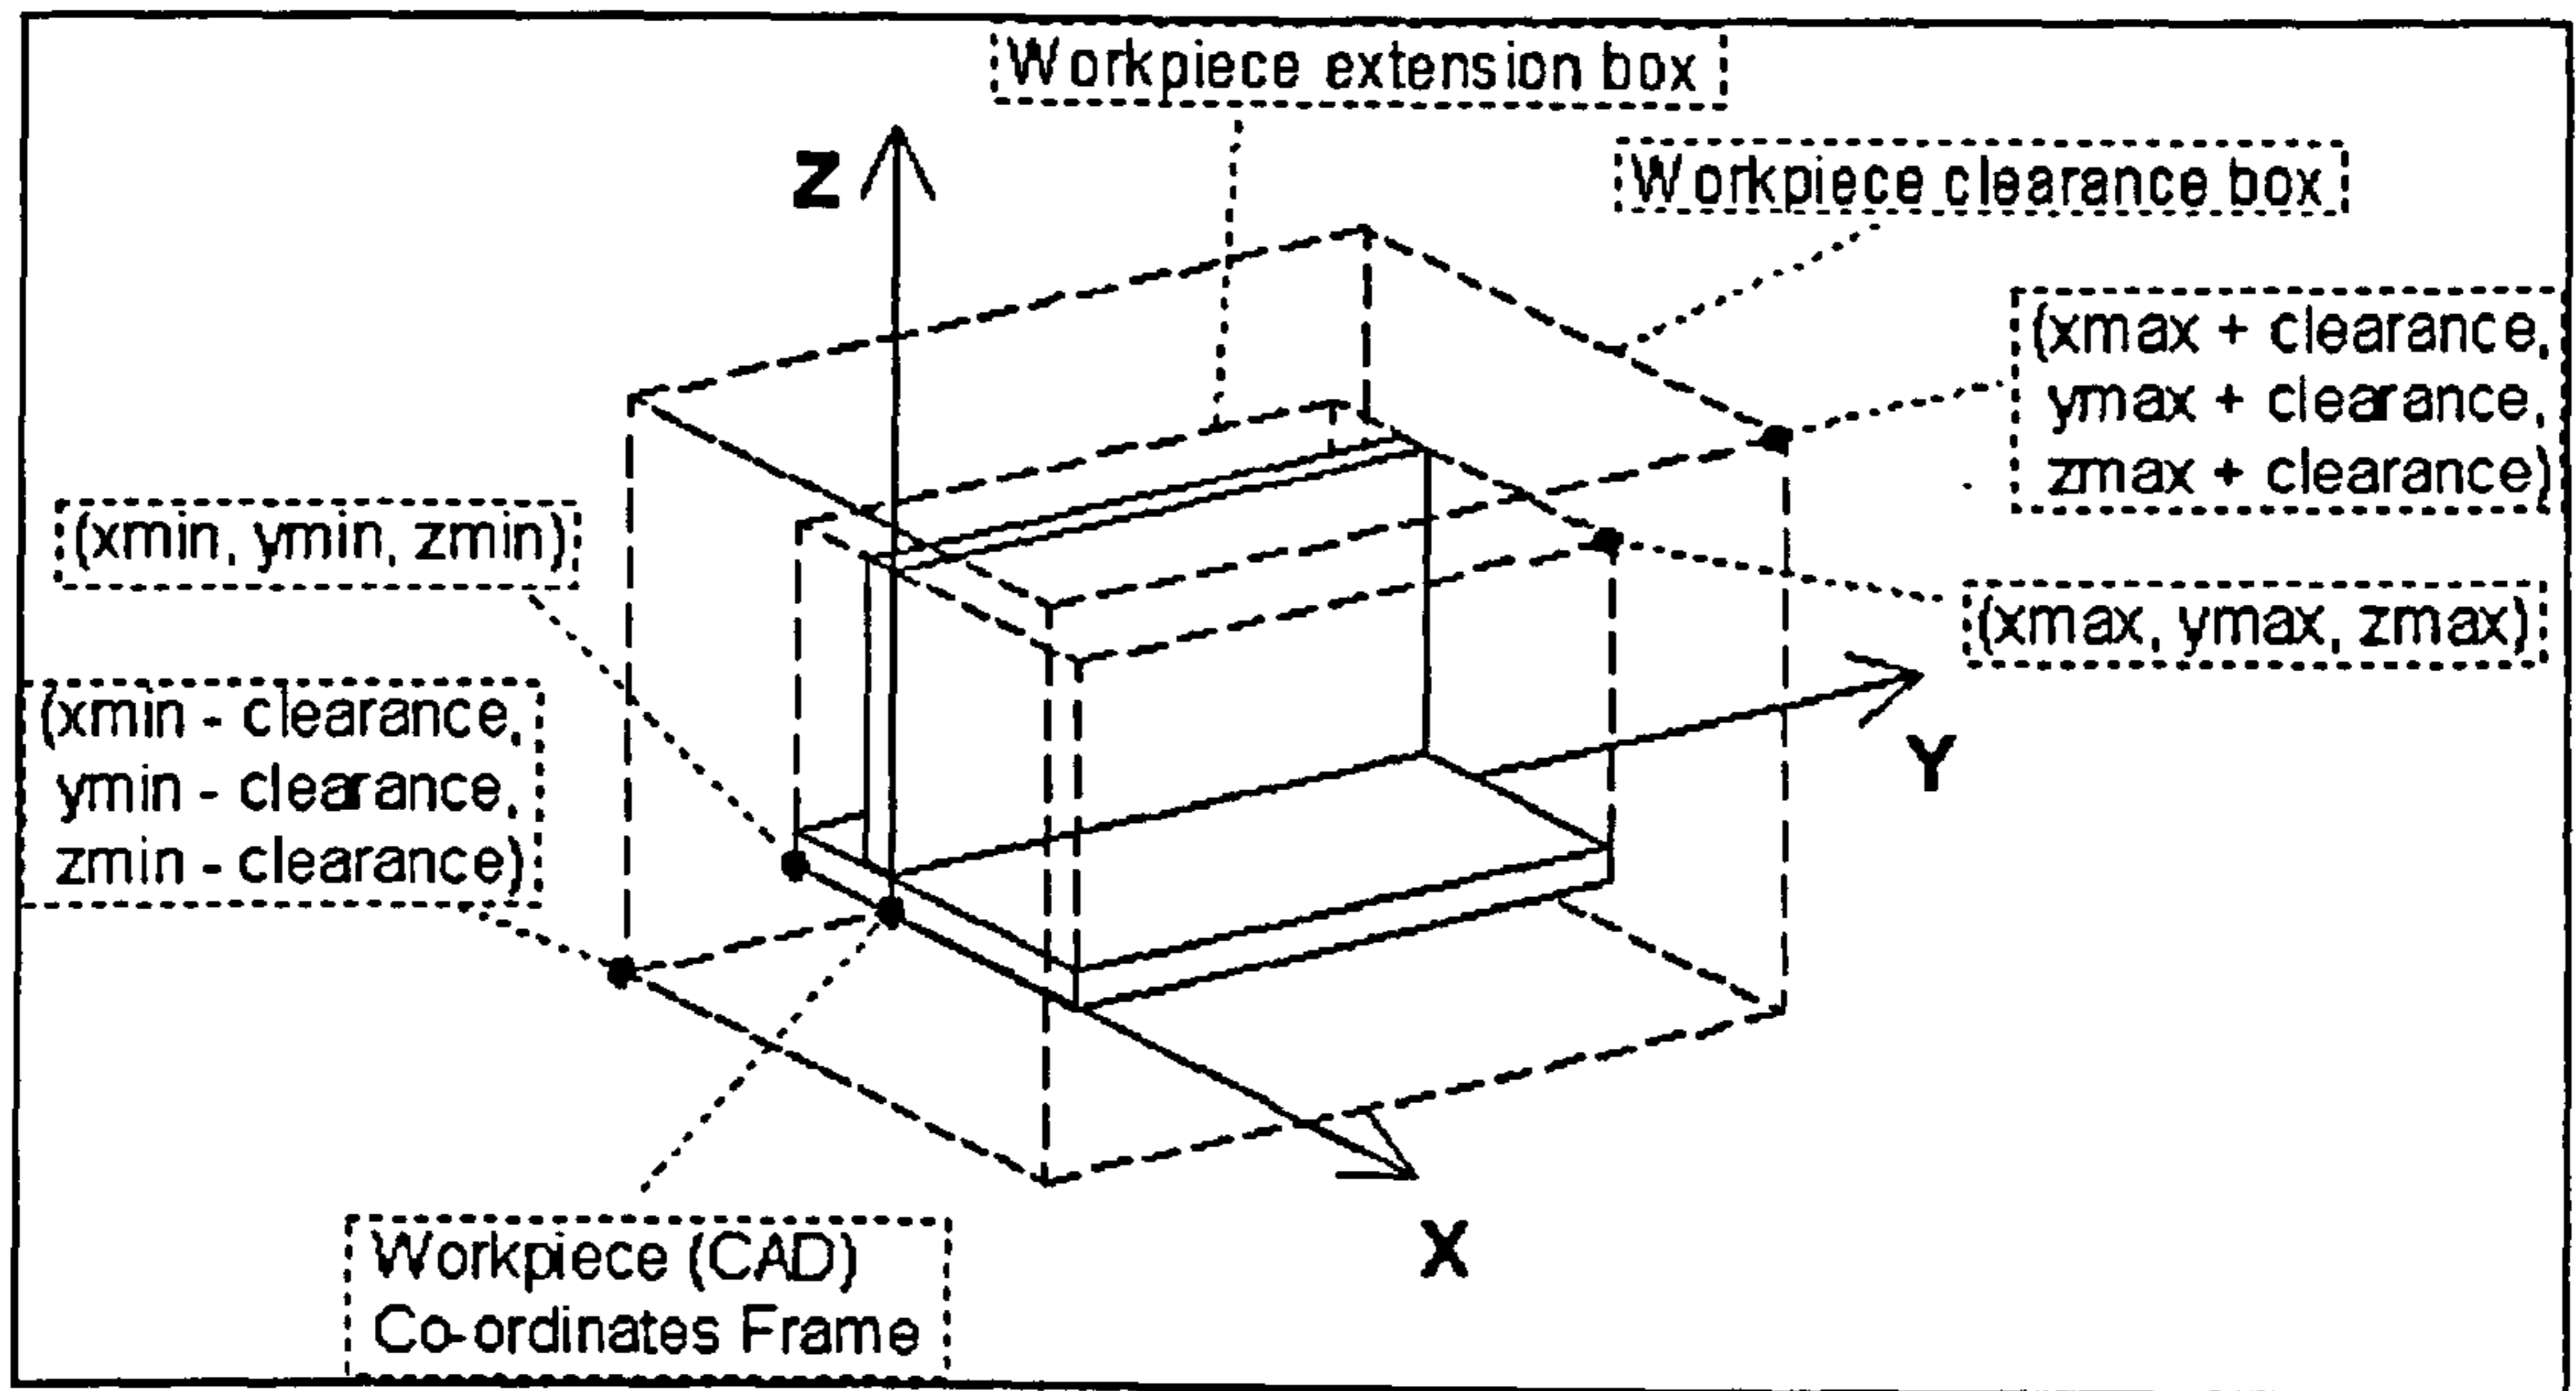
Definition of "workpiece extension box" and "workpiece clearance box"
